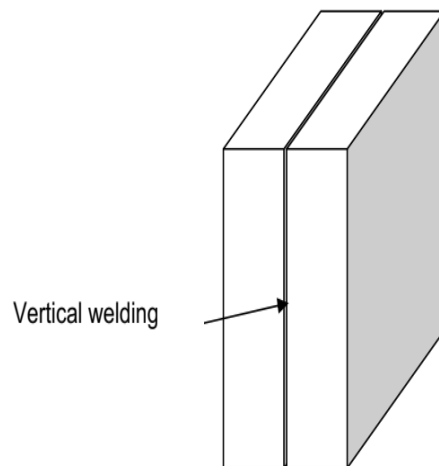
Scheme of placement of components to be welded for vertical welding
